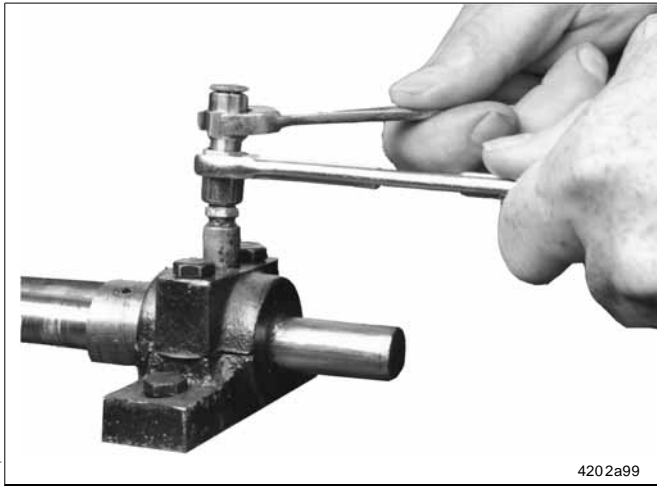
Screwing Quicklinc fitting into the Zerk-Lock body
